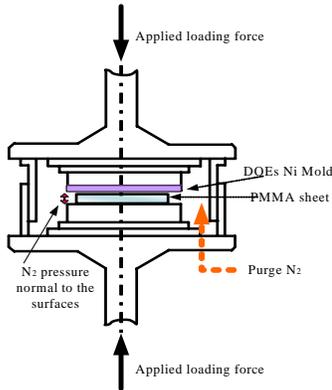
Schematic illustration of demoulding mechanism for hot embossing process
